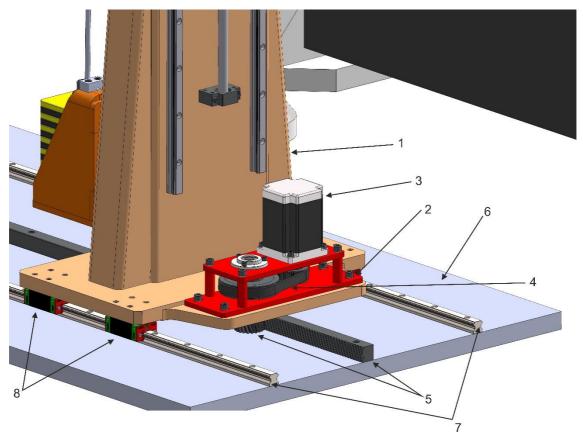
Design of the mechanism for horizontal movement of the mobile industrial robot: 1 - column (base) of the robot; 2 - drive frame; 3 - stepper motor; 4 - toothed belt transmission; 5 - rail transmission; 6 - horizontal support plate; 7 - guides; 8 - linear bearing supports.
